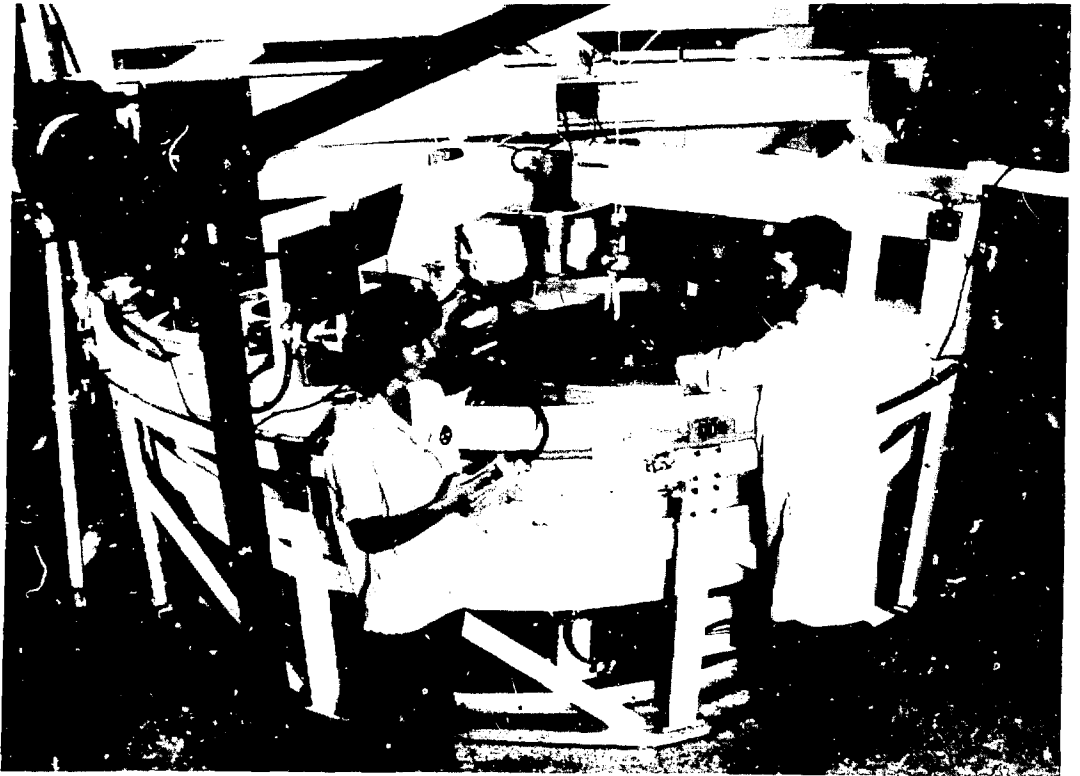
Twelve foot diameter flat lapping machine at Zygo Corporation.
